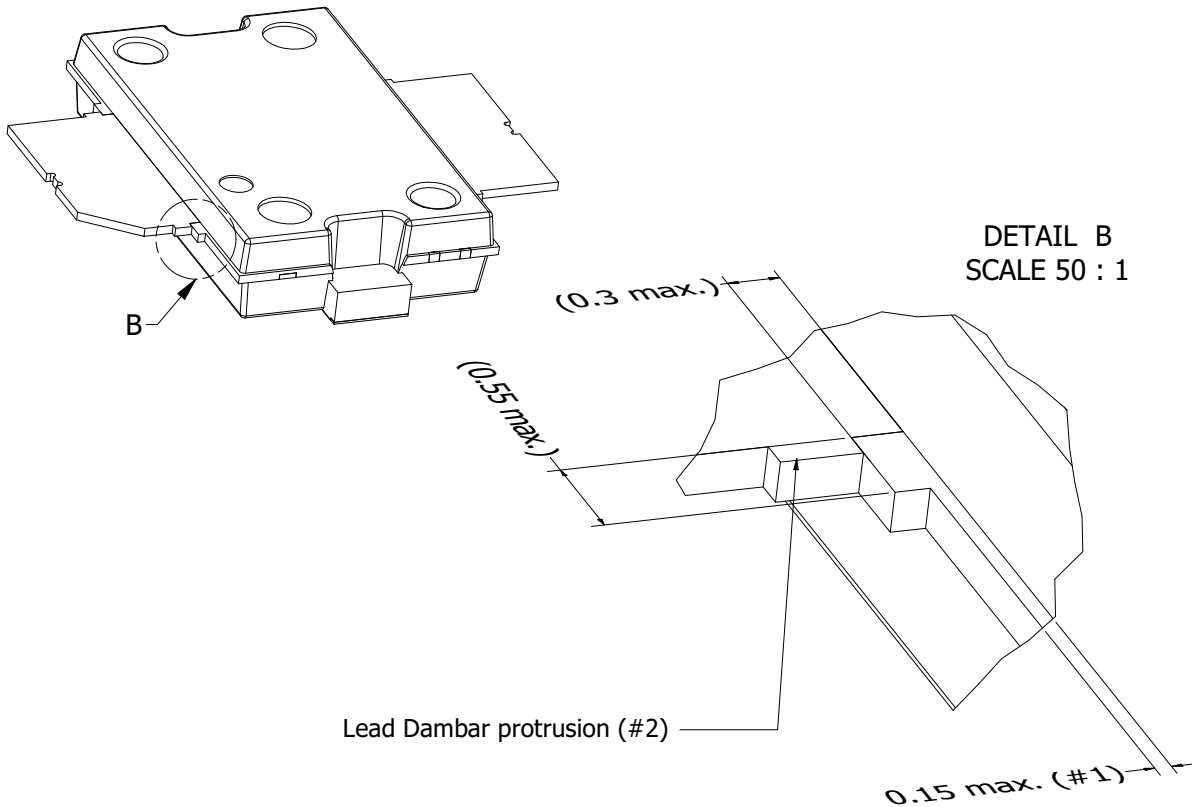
Package outline TO-270-2F-1 (sheet 1 of 2)
